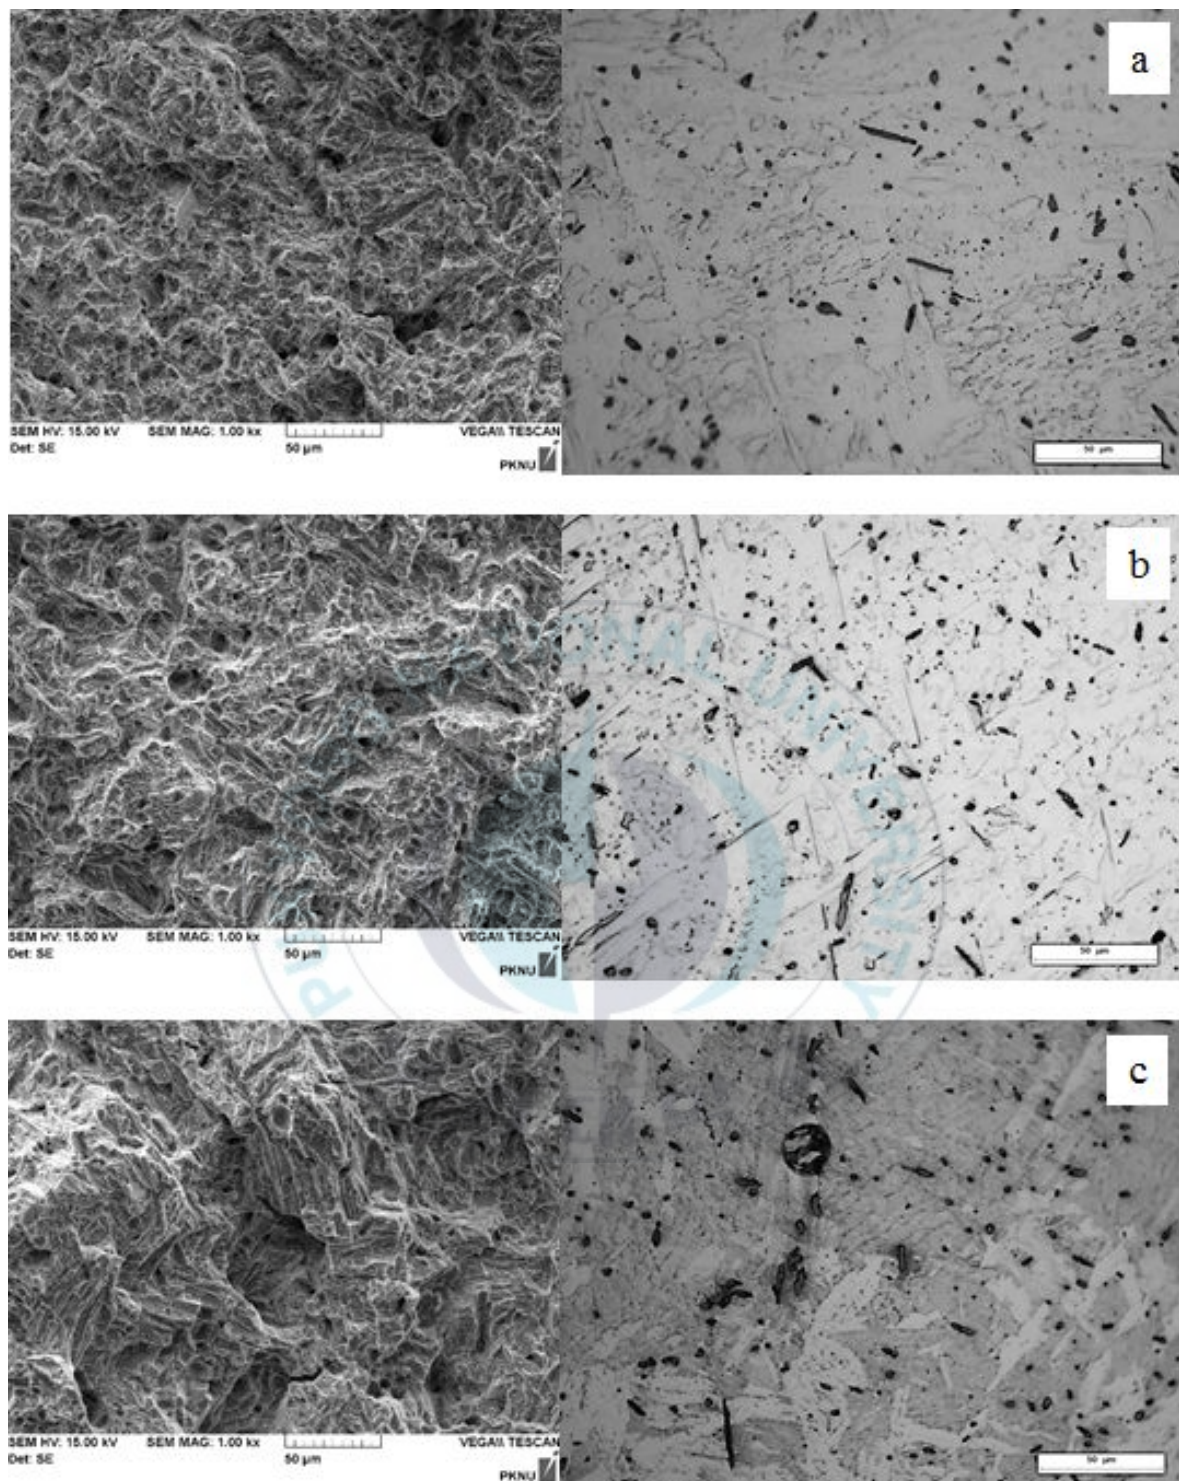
Tensile fracture surface and optical microstructures of centrifuged specimens
